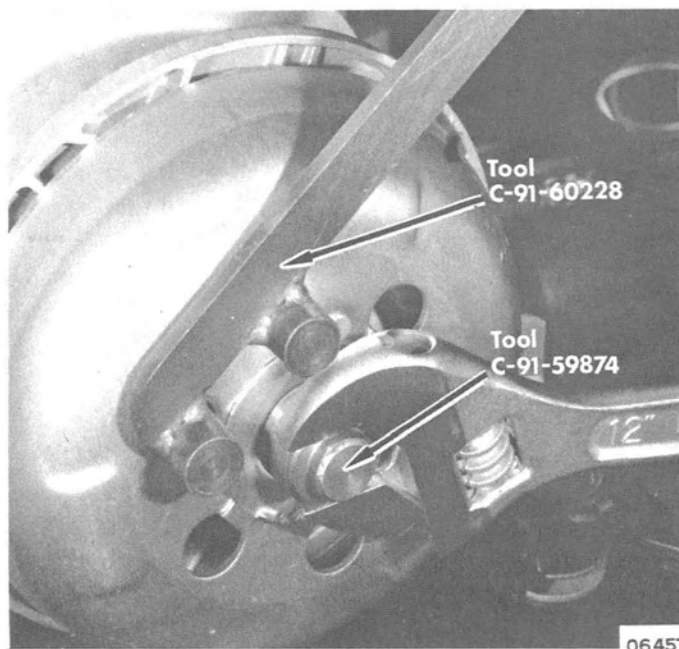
Removing Sheave from Crankshaft with Tools C-91-59874 and C-91-60228
